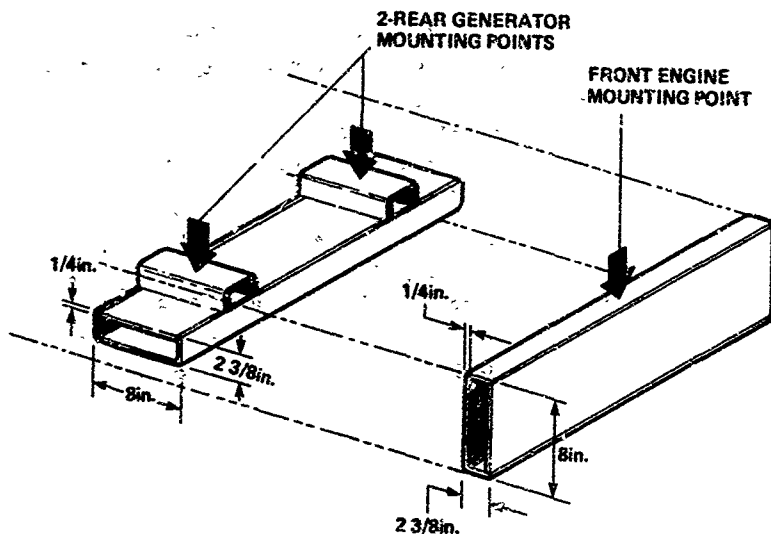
ORIGINAL ENGINE/GENERATOR MOUNT CONFIGURATION.
